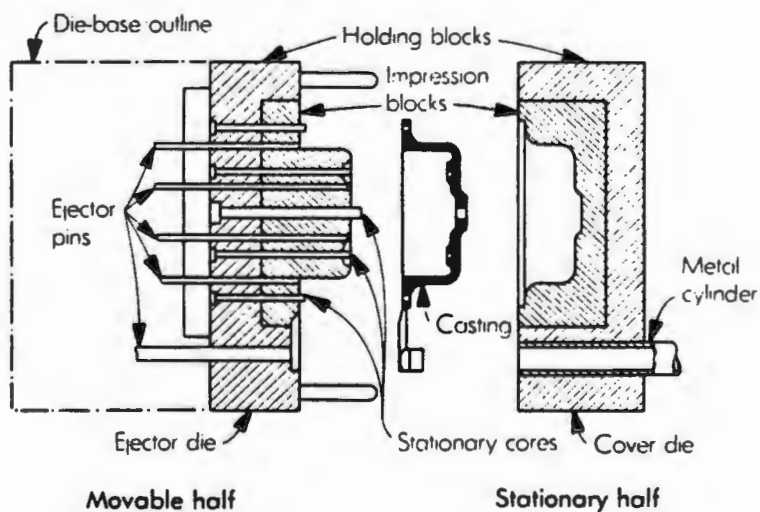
Typical Die Casting Die (Reprinted from [13])
